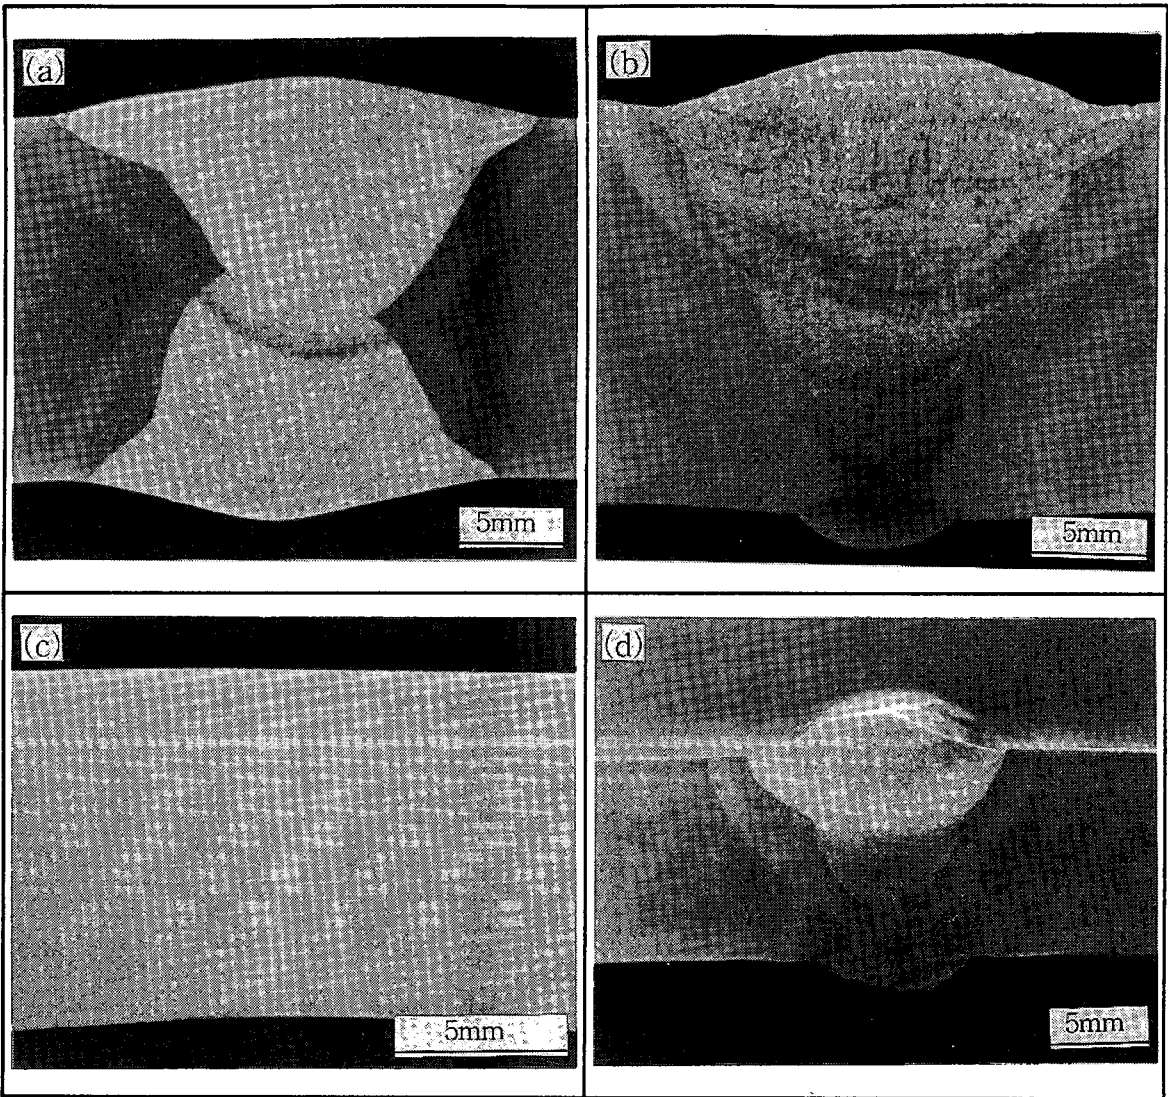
Macrostructure of X65 and X42 weld joint.
